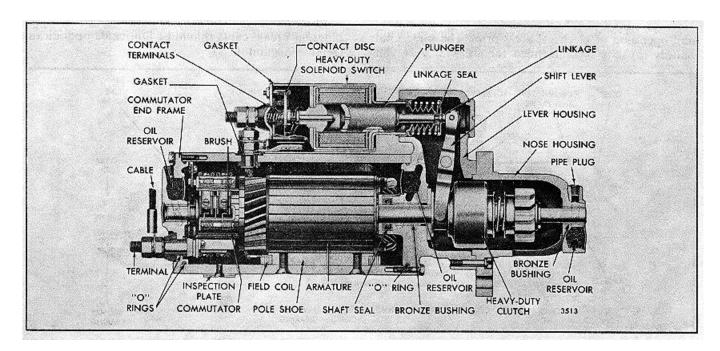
Cross-section of Starting Motor with Sprag Heavy-Duty Clutch Drive
